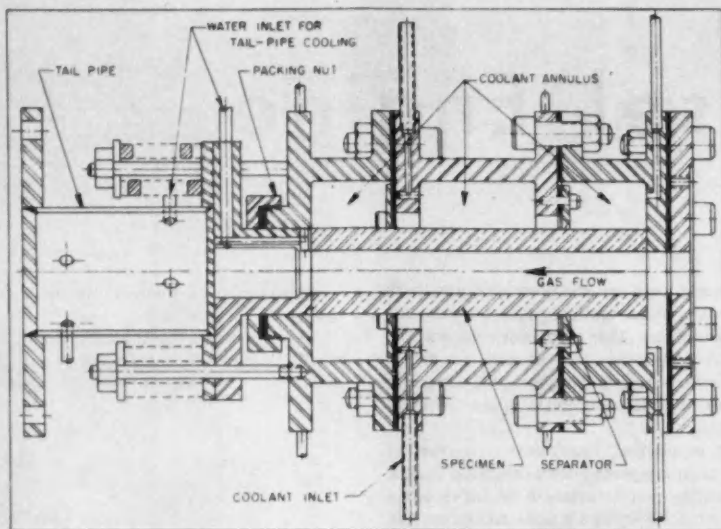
This sectional view of the apparatus used for sweat-cooling tests shows the location of coolant annulus, coolant inlets, and the porous cylinder.
